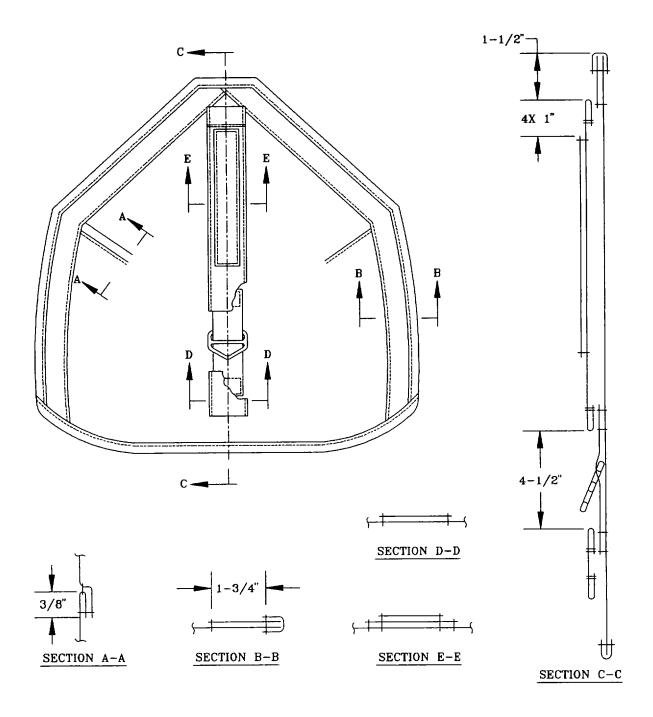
(Container Side Mounted) Upper Cap Assembly (Sheet 2 of 2)
